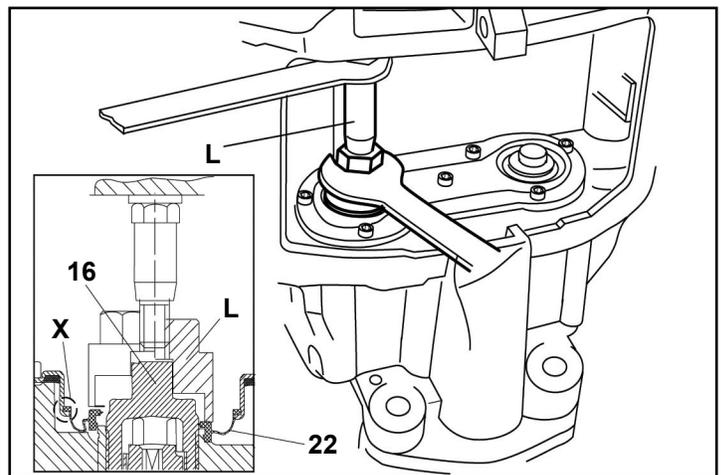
OFF-VEHICLE INNER SEAL INSTALLATION
